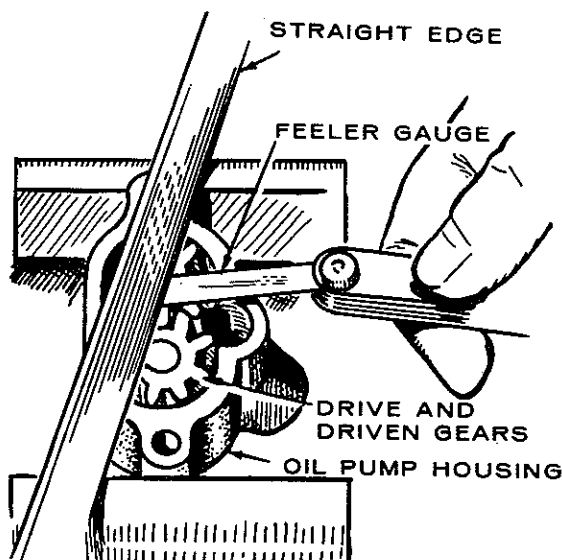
CHECKING OIL PUMP FOR WEAR
